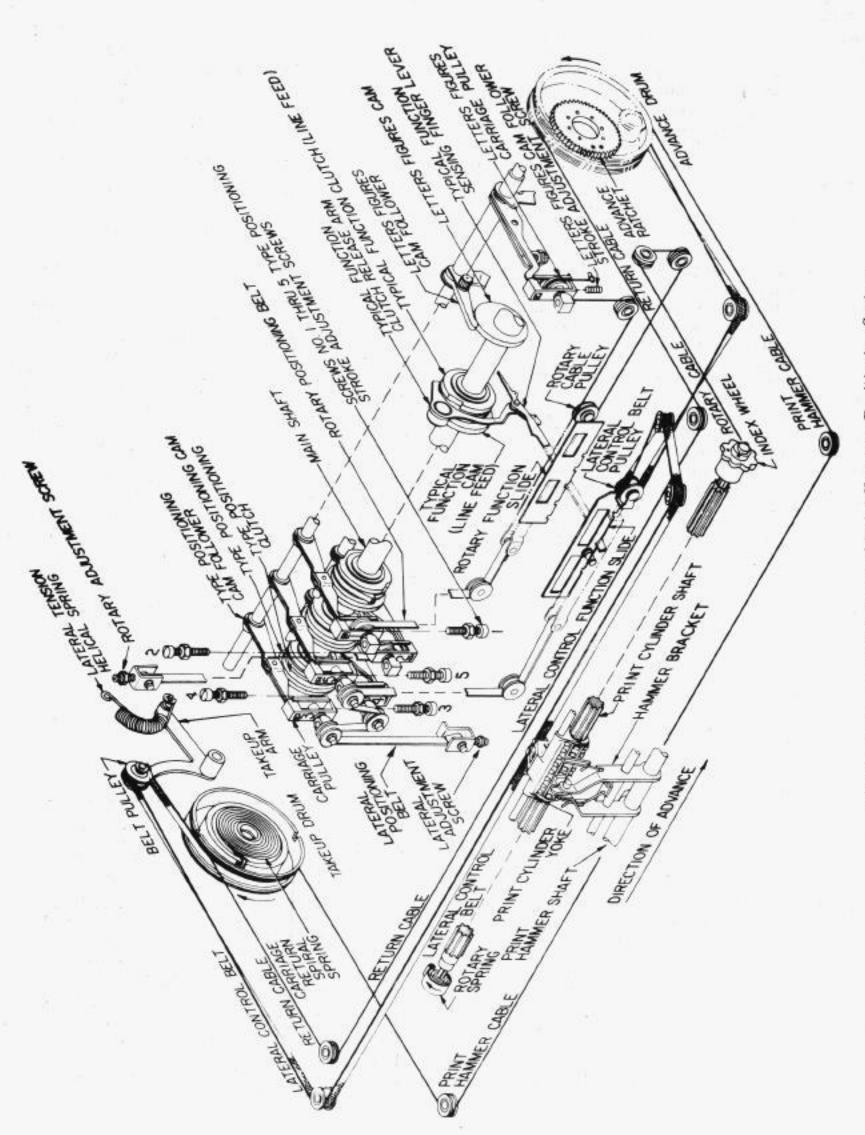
Type Cylinder and Print Hammer Positioning System
